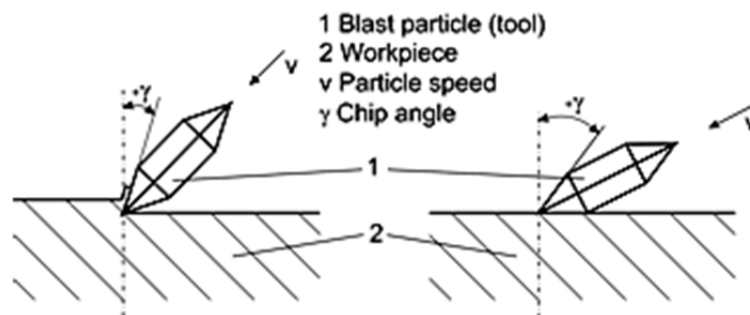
Behaviour of a solid blasting abrasive at surface of a workpiece [3]
